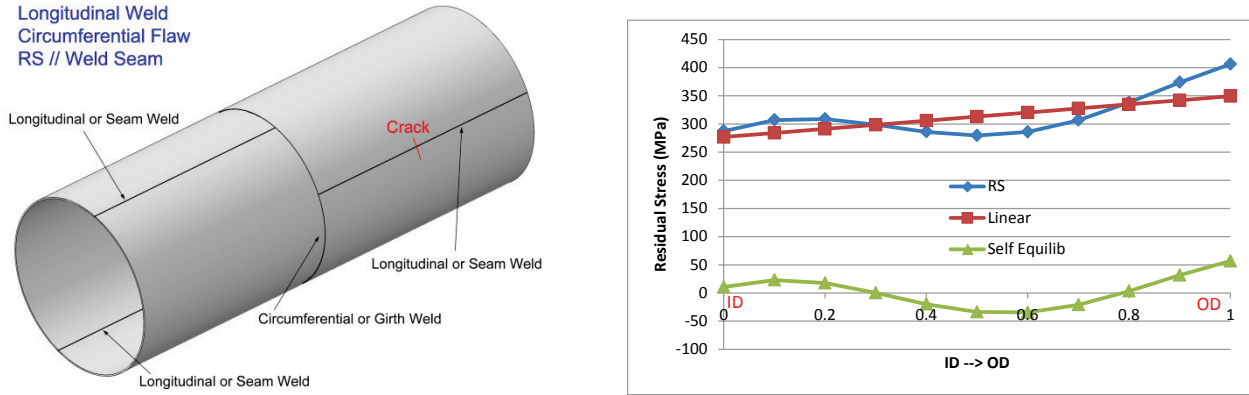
Case 4: Circumferential Crack Perpendicular to an Axial Weld - Residual Stress Parallel to the Axial Weld with a Double-V Notch
